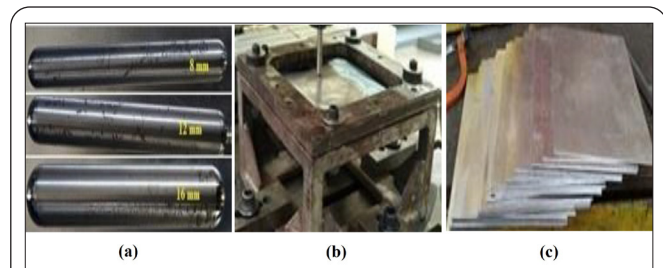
(a) Tool, (b) fixture, and (c) worksheet in SPIF.
